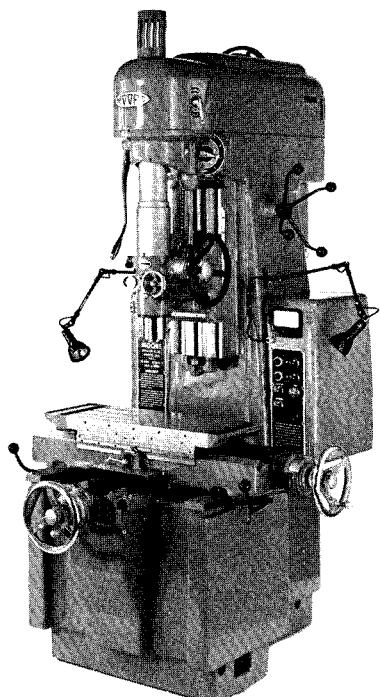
The No. 2 *Jig Borer* utilized the same principles as the Model No. 1 *Jig Borer*, but was larger overall, with an infinitely variable spindle speed; moreover it introduced the use of Nitralloy lead screws.
